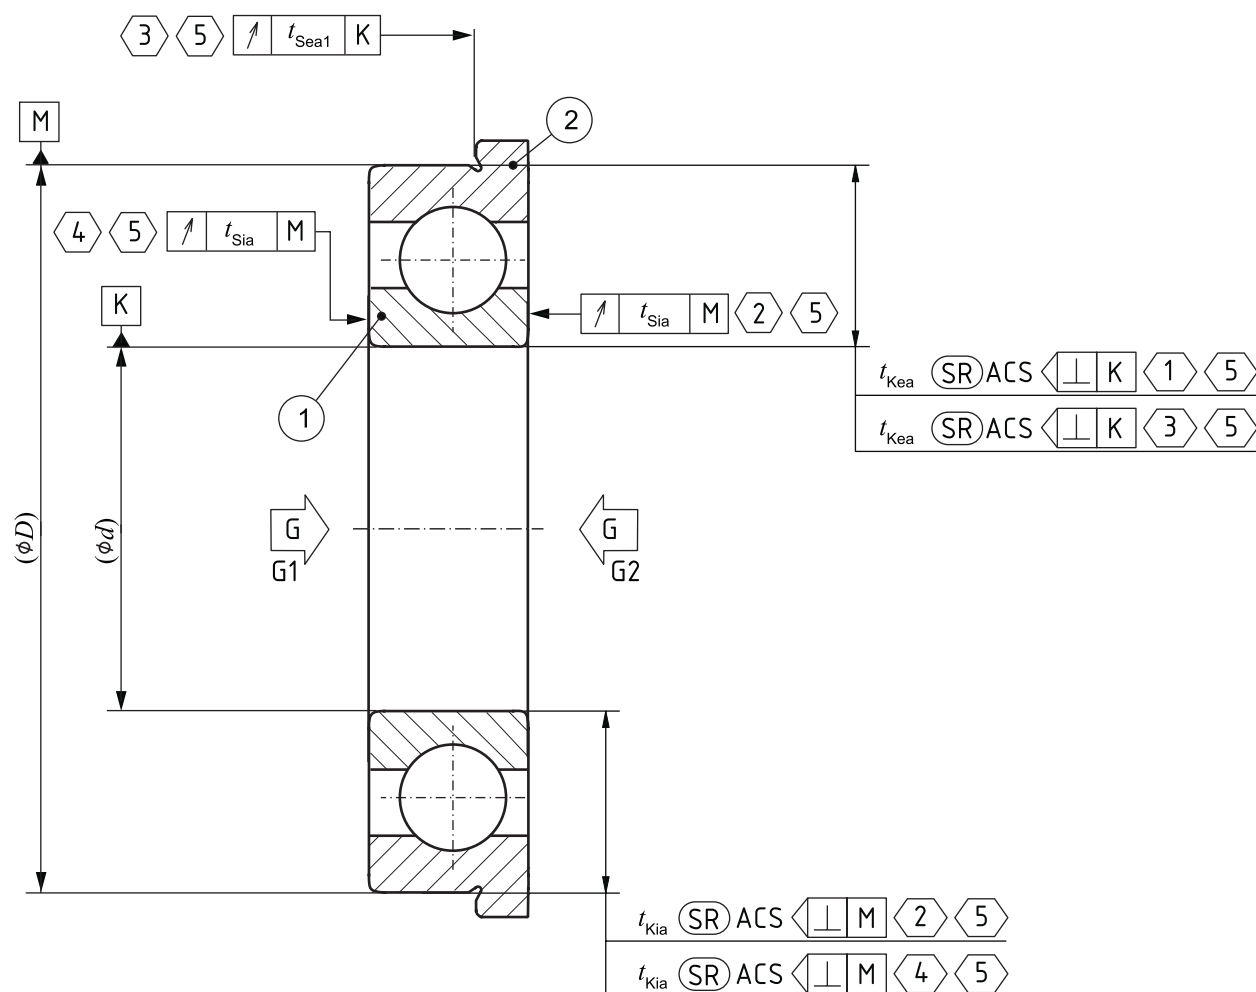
Geometrical tolerances for single components of bearing with flanged outer ring
